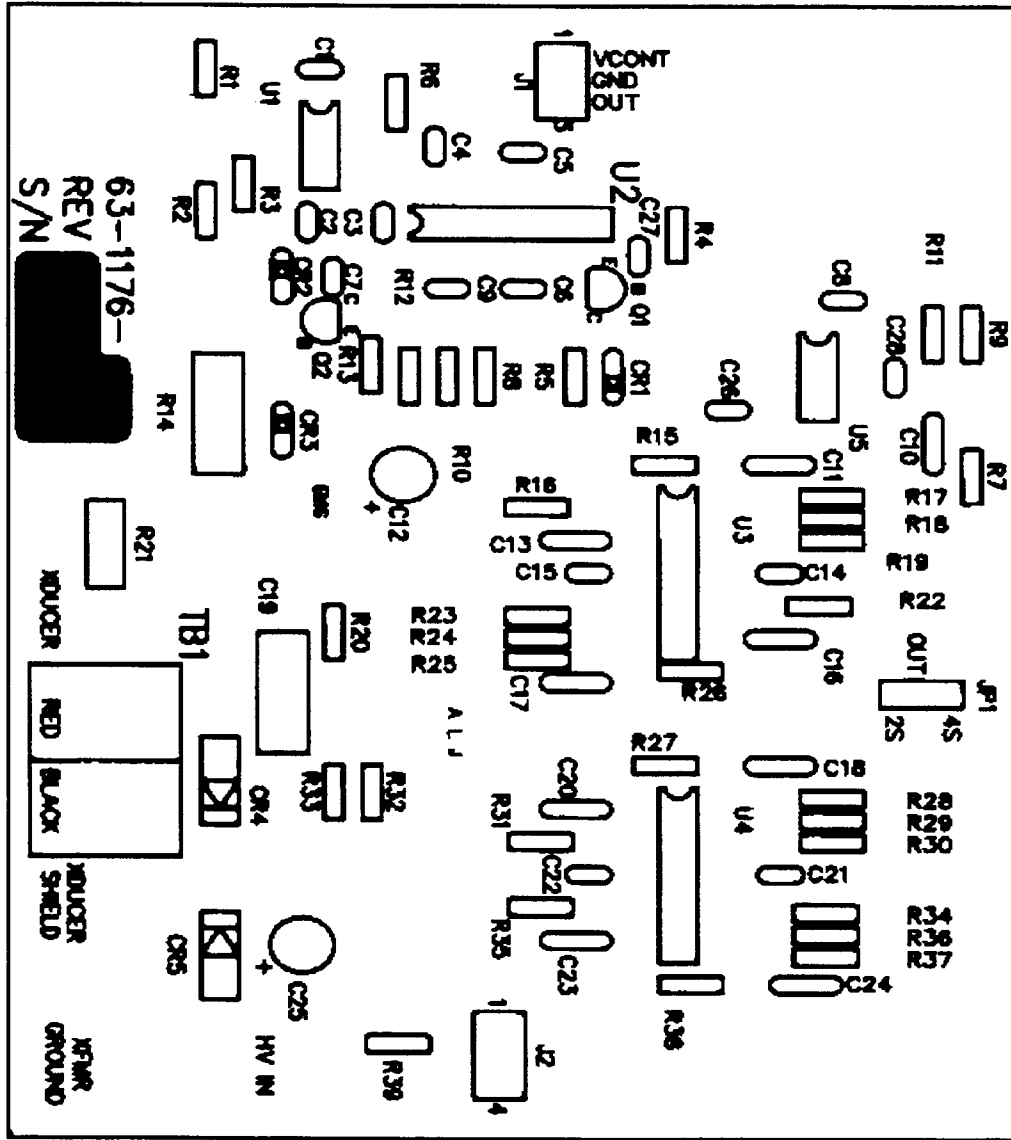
Assembly Drawing of the Filter Module Board (20-, 30-, and 50-foot Systems), P/N 63-1176.
